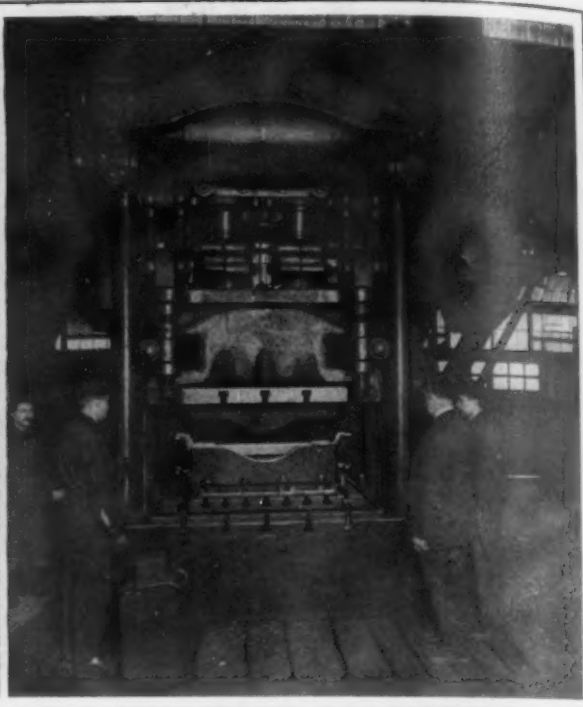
View Showing the Front Axle in the Press Before Being Formed, but After Bearings at Each End Have Been Forged
